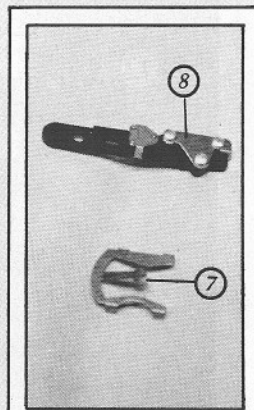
Blower Speed Switch Detail: vacuum valve tension spring (7) fits on vacuum valve drive with blower speed switch arm (8).
